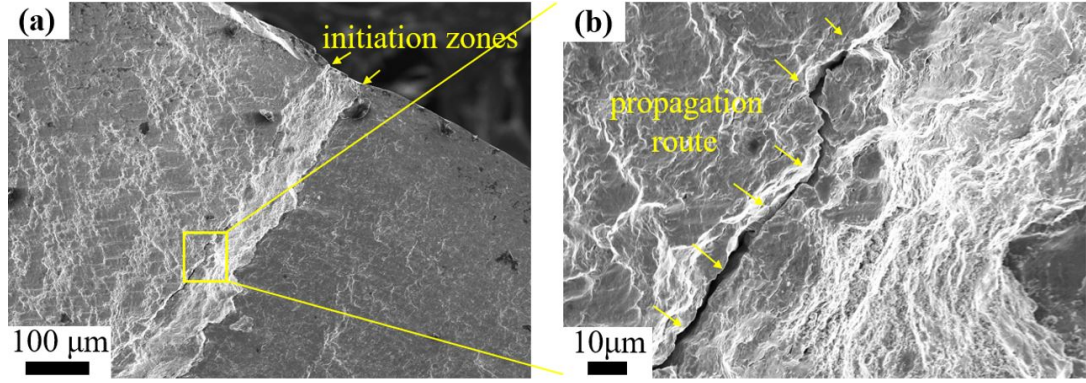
The fatigue fracture surface of unburnished DSS sample broken in 5.282.618 cycles at 75% of σ_{yield} (a) crack initiation zone, (b) crack propagation
